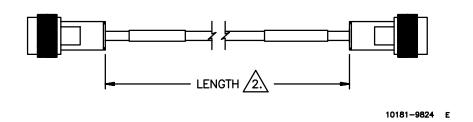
PA-Coupler RF Cable Assembly (10181-9824 Rev. E)
